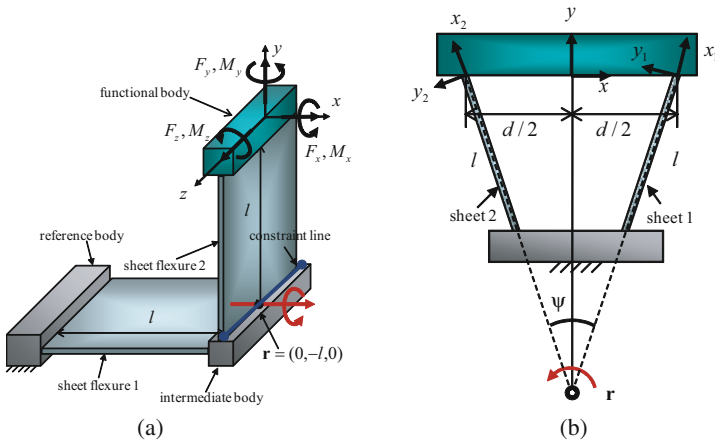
(a) A serial chain compliant mechanism formed by two perpendicular blade flexures, (b) A parallel chain flexure mechanism formed by two parallel ideal blade flexures
